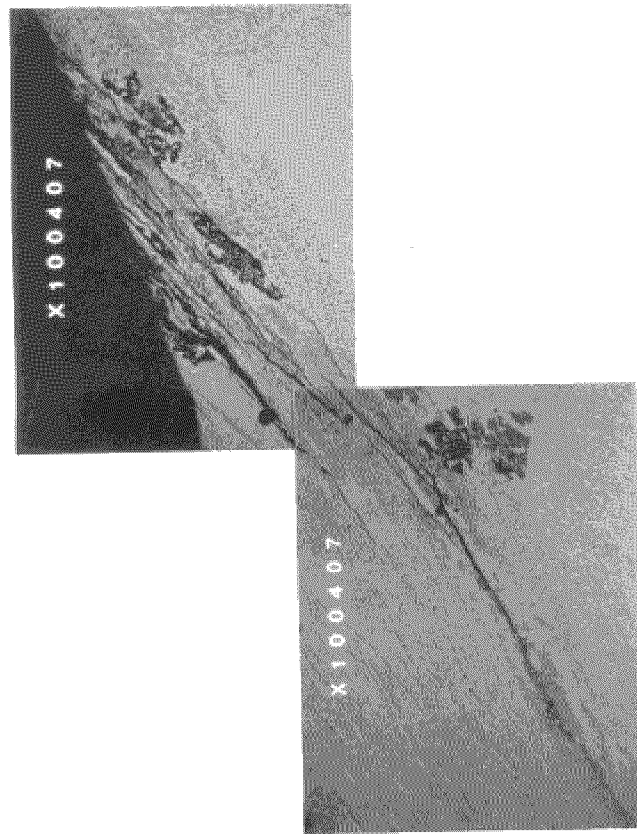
Stress Corrosion Cracking on a Br.1150 bomb bay guide rail
